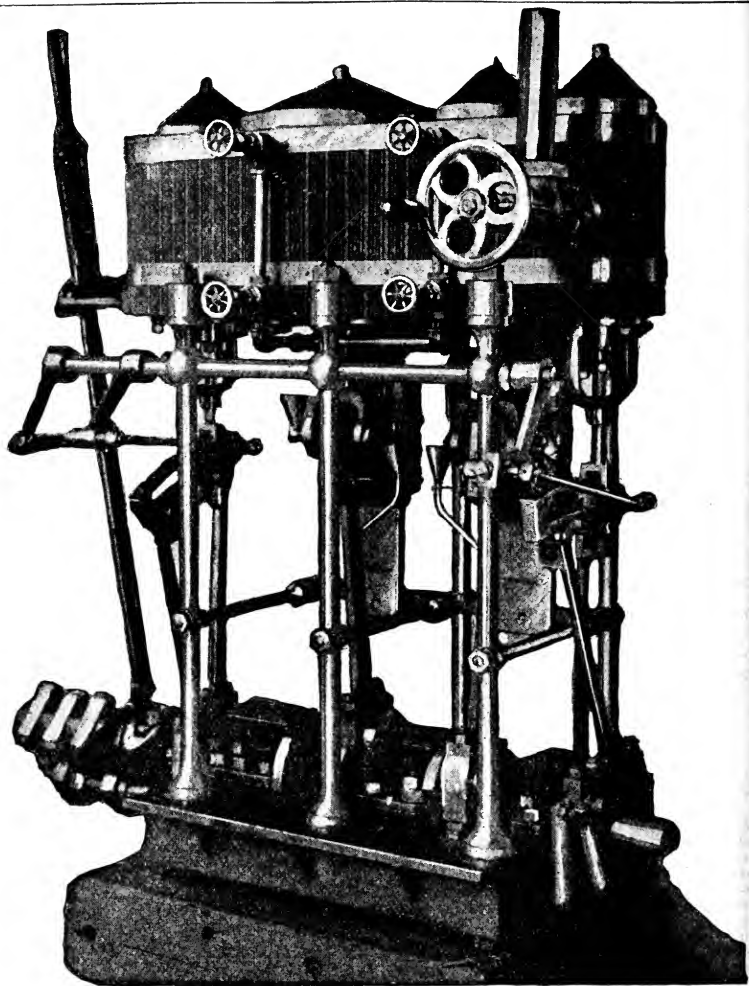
,069.—Fore and aft compound engine, designed by the author for 35' X 7' launch "Stornoway"; illustrating the accessibility due to the open column type frame; also, self contained ball thrust bearing. Cylinders $3\frac{1}{2}$, and 8, by 6; cylinder ratio 1 : 5.23; shifting link motion with adjustable arm on *h.p.* gear; piston valves; mahogany cylinder lagging with nickel plated bands and cylinder head bonnets. The bearings are proportioned for high speed heavy load service.
